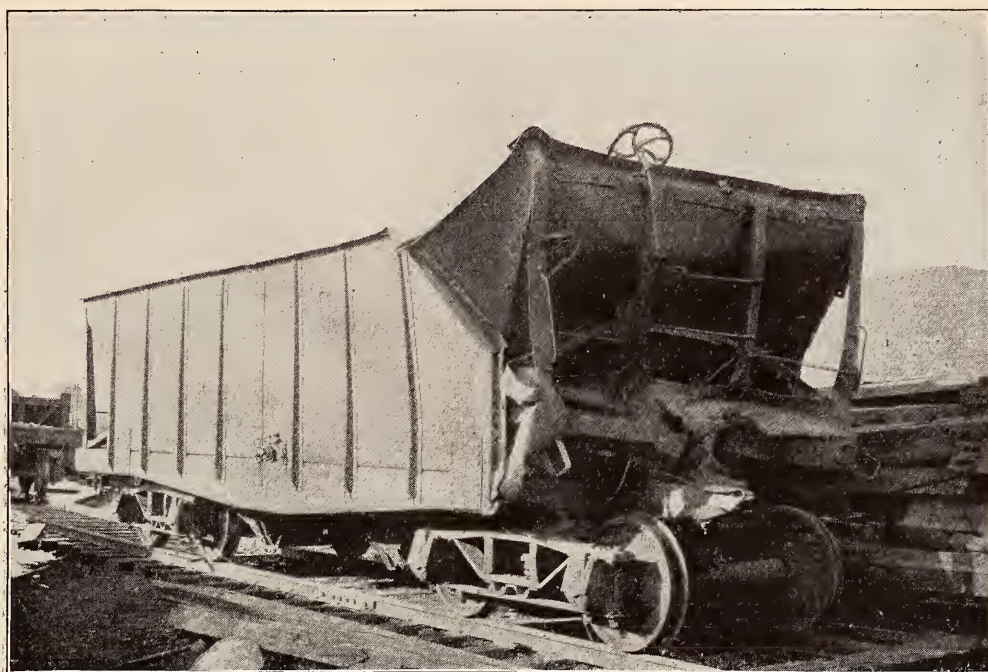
FRICITION DRAFT GEAR IN A COLLISION.
